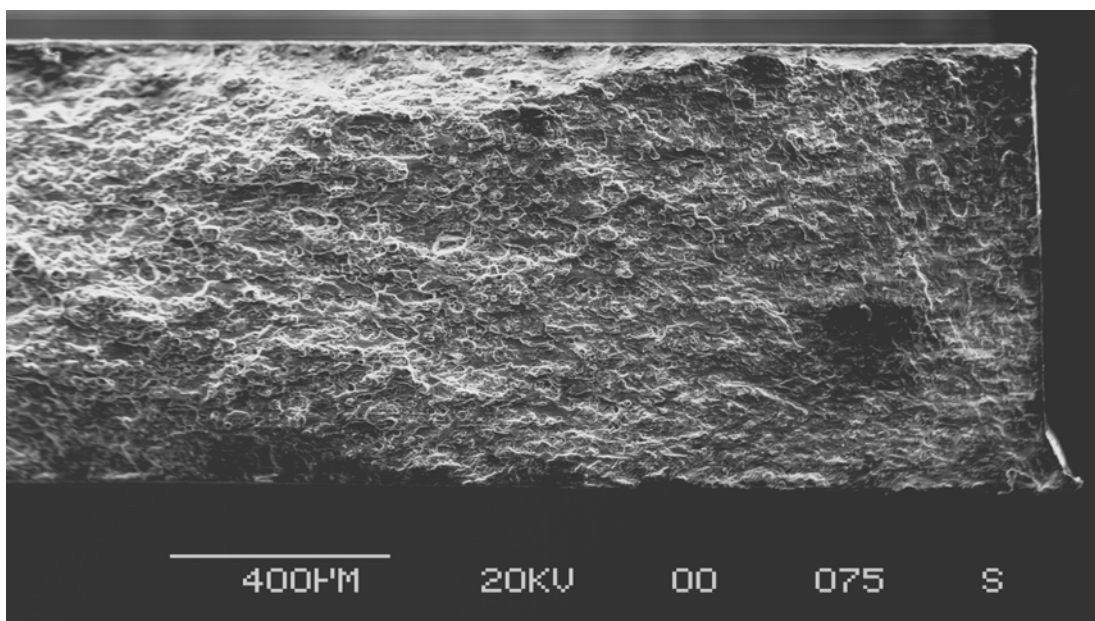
Fatigue Crack on Fracture Surface of Specimen 5946.
